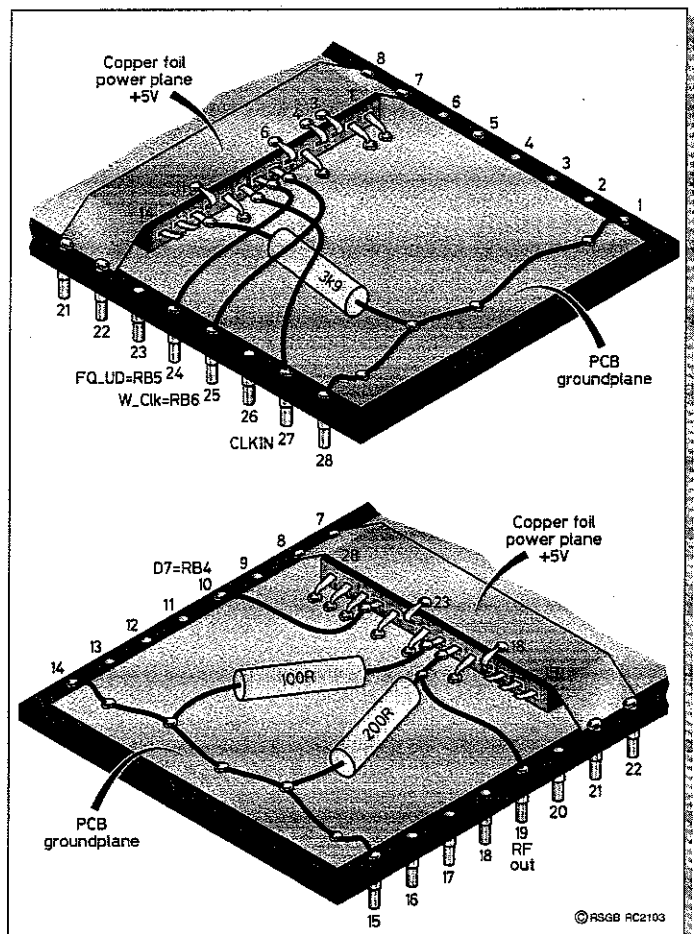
DDS Assembly. The DDS chip is mounted upside down (dead bug) on the PCB ground plane. A strip of copper foil provides a low impedance power plane. Not shown is a 1nF decoupling capacitor, connected between the ground and power planes adjacent to pin 1 on the chip.
